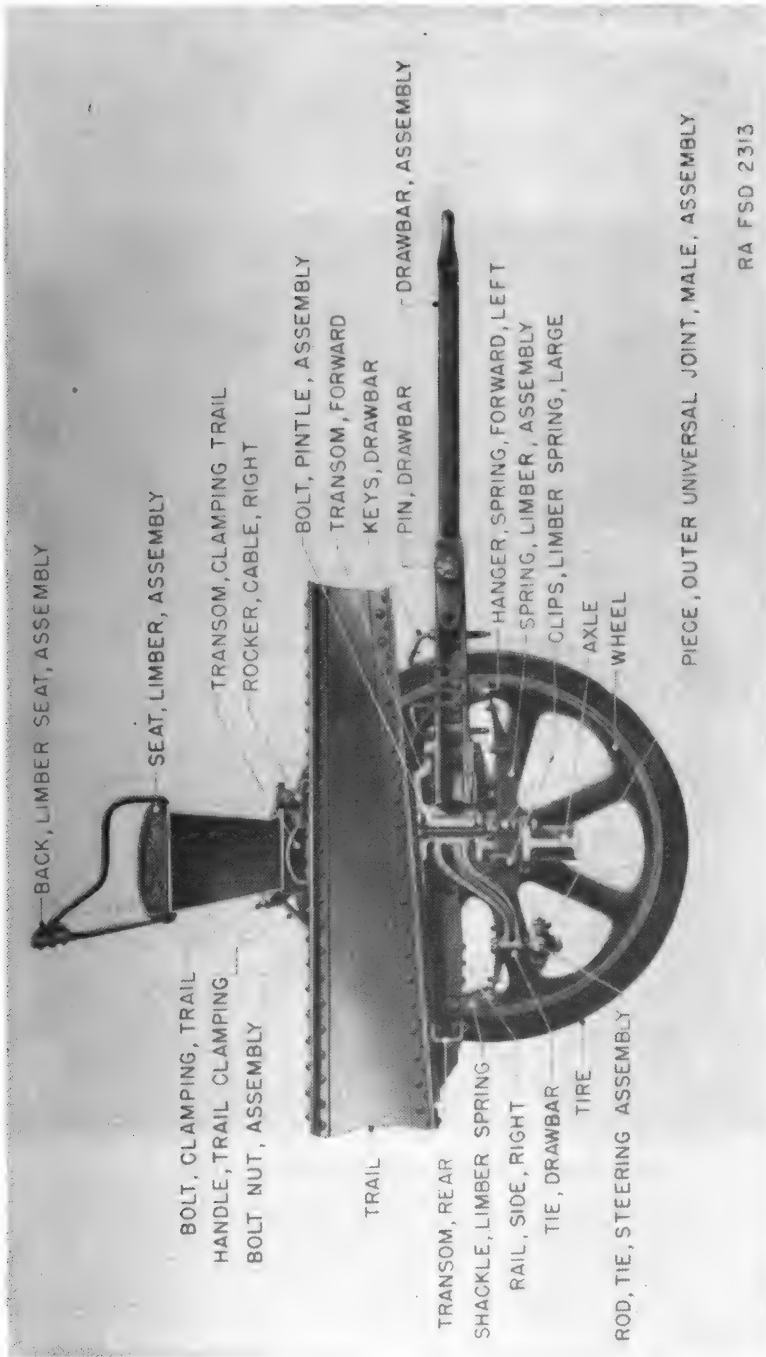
155-mm gun carriage limber—longitudinal section.
